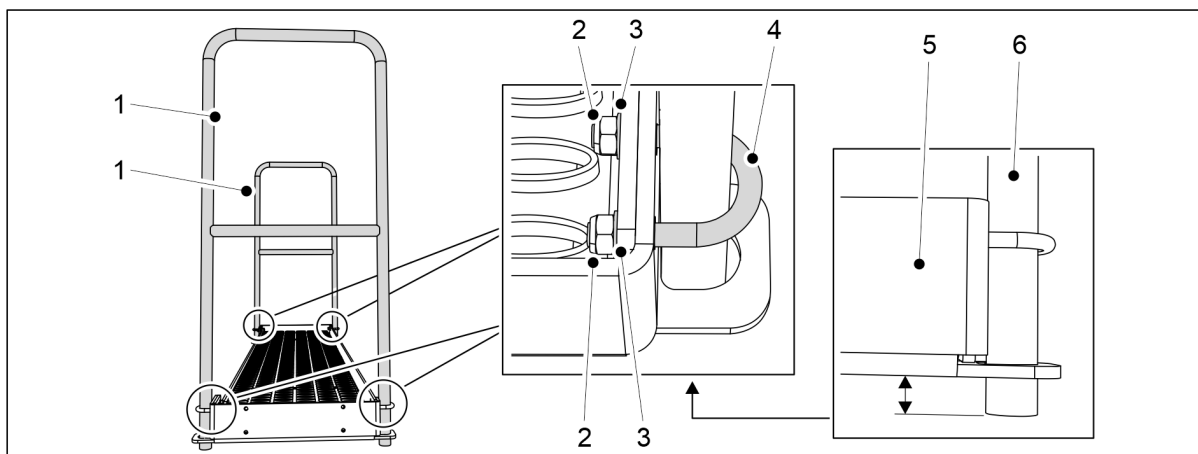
76. Mounting handrails on a CEREX 300 EVO machine
